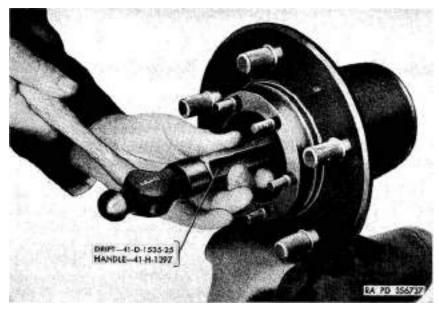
Removing hub inner bearing cone and hub bearing oil seal assembly.
